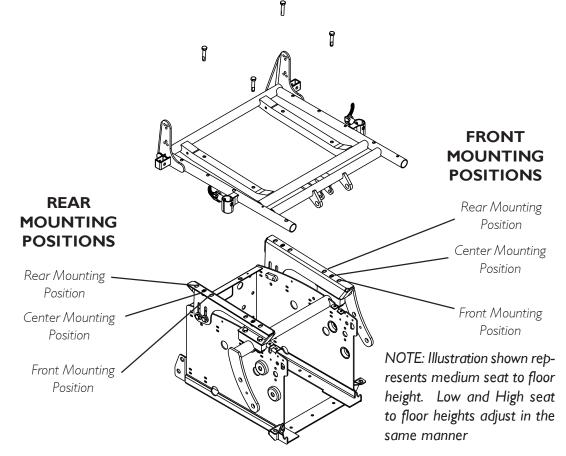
ADJUSTING THE SEAT POSITION ON THE SEAT FRAME
